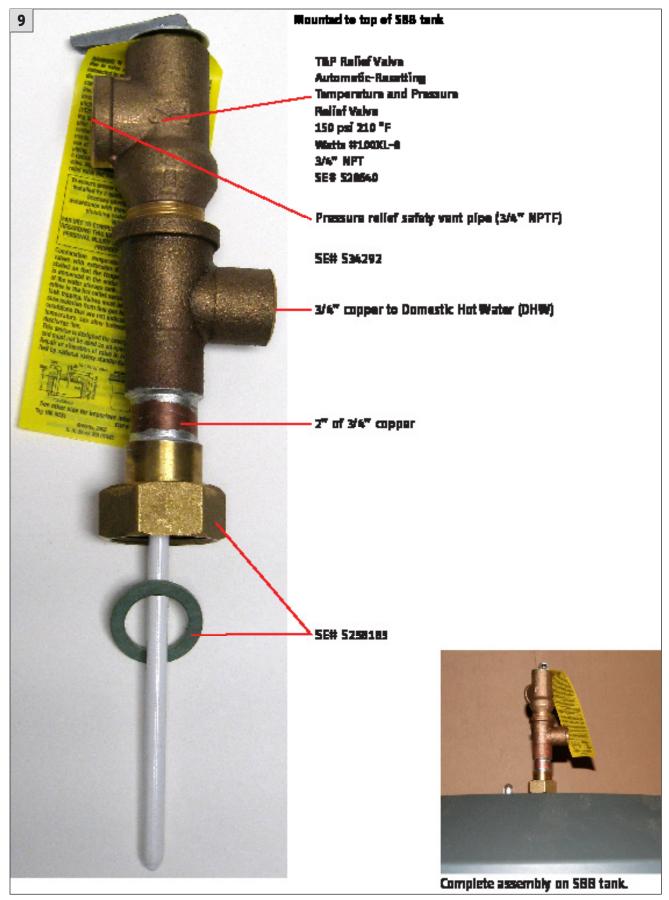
Assembled view of T&P relief valve assembly including part numbers
